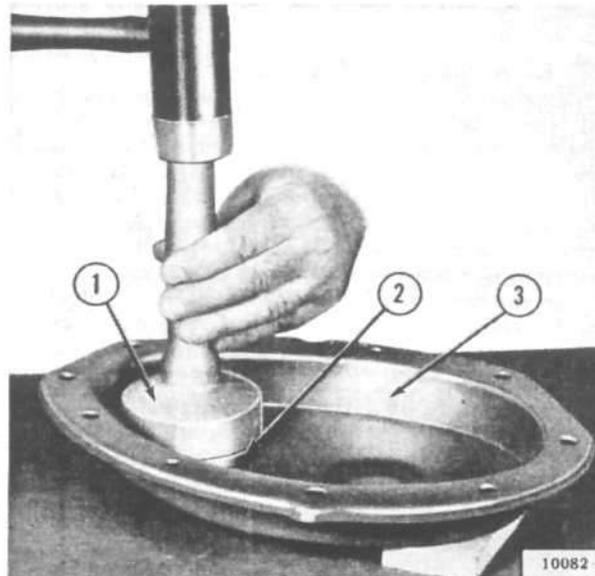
INSTALLING TIMING CHAIN COVER OIL SEAL
